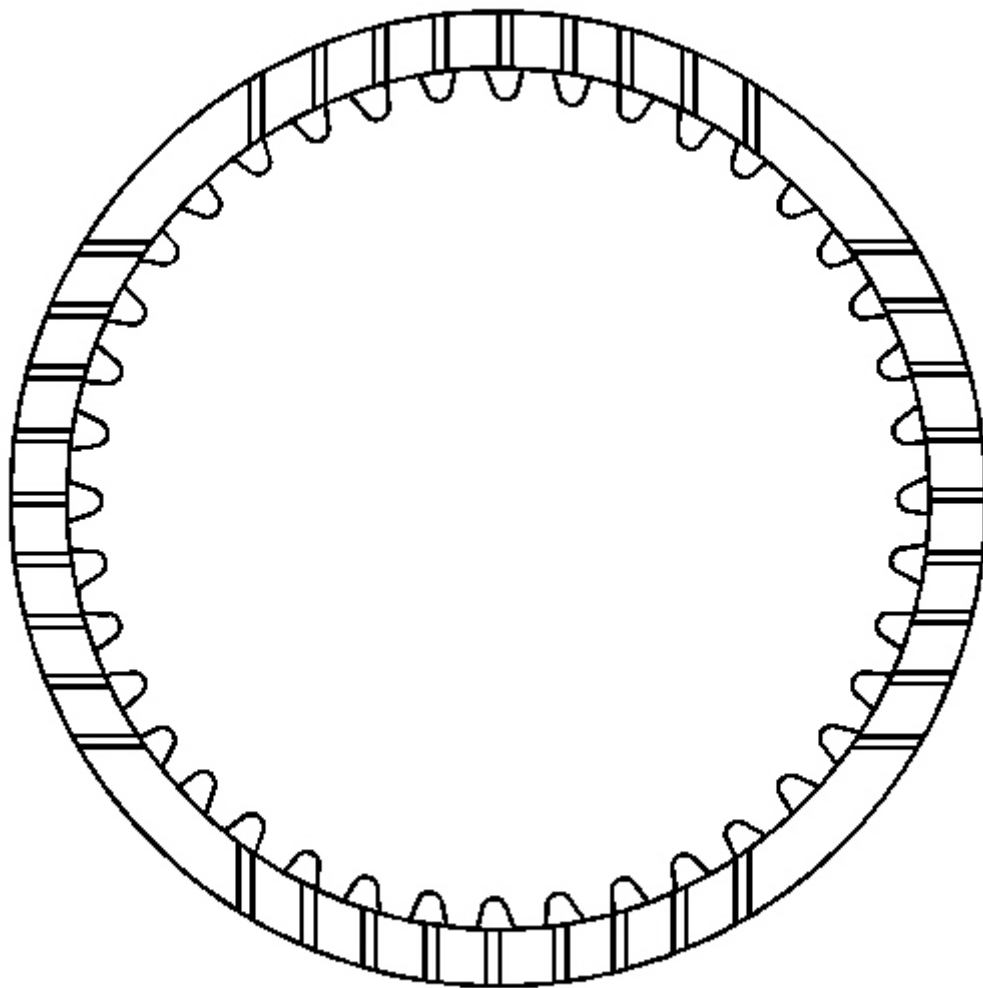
Checking The Sliding Surface Of Disc, Plate & Flange For Damage
